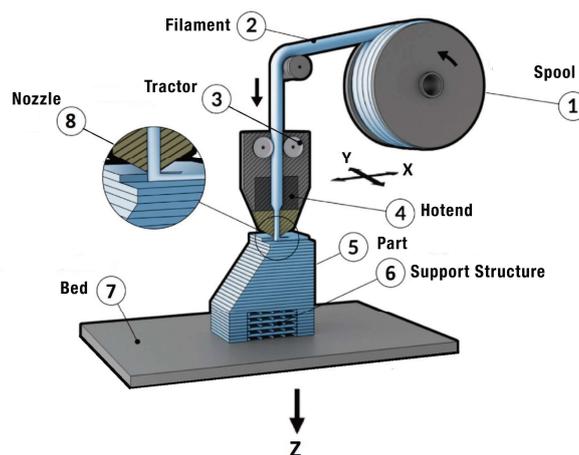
Fused Filament Fabrication extrusion system, *ADAPTED* from Manufacturing Guide.
